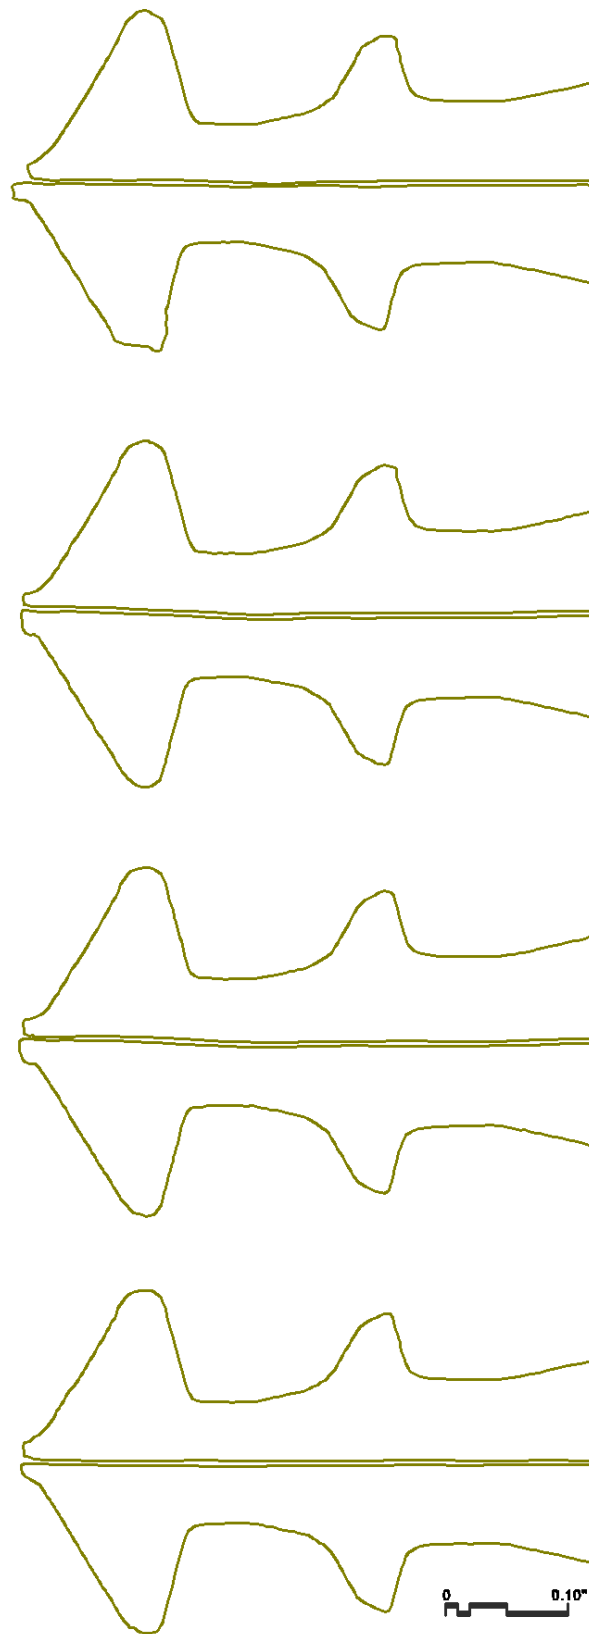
As-Built 0.120 in. Tube-A Coined Pressed-End CAD Generation - Step 4
